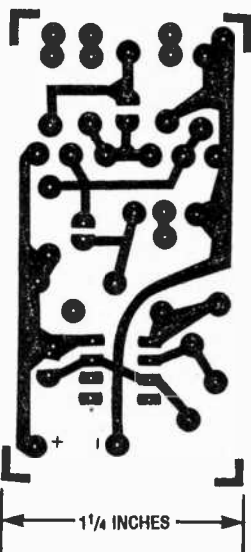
The author's prototype of the circuit was assembled on a printed-circuit board, the template for that printed-circuit layout is shown here full size.
